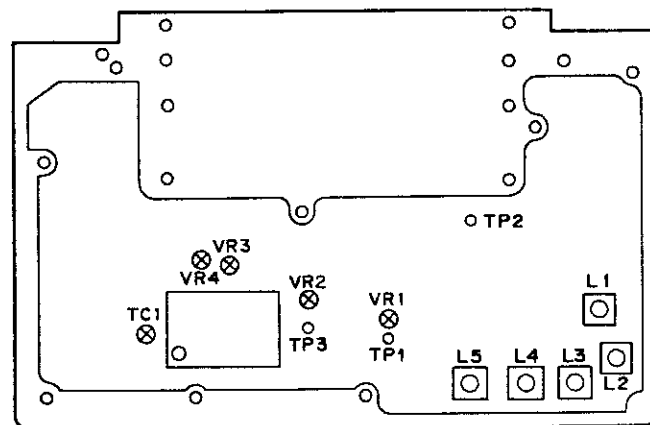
50 MHz BAND adjustment: Component layout (upper view)
